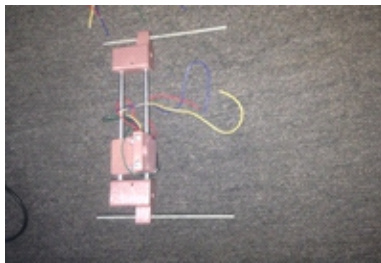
x-axis Fabricated with Stainless Steel Rods and 3D Printed Parts.
